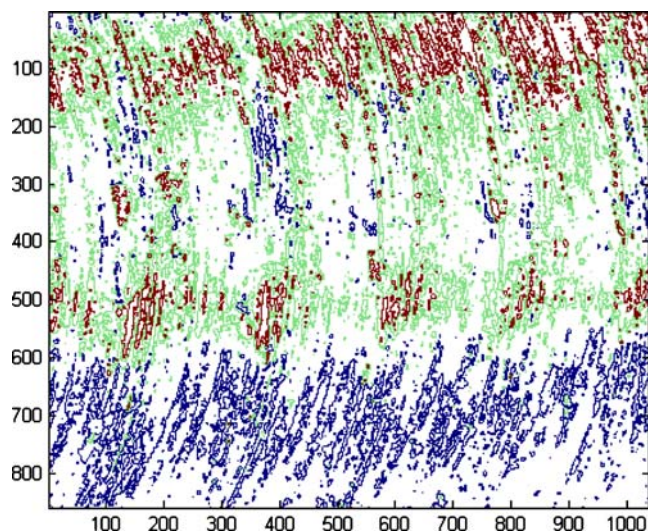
Even contours shown by the processed image of a uniformly welded plate
